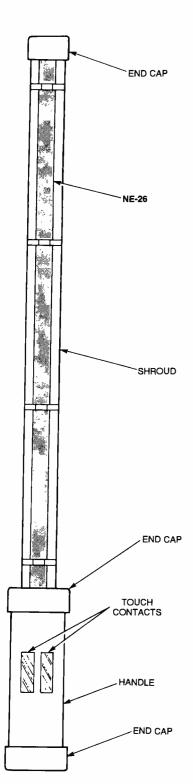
Insert the NE-26 tube assembly with spacer rings and assembled printed-circuit board into the shroud as shown: It may help to moisten the inner walls of the shroud by deeply exhaling into one end and quickly inserting the neon tube assembly.
